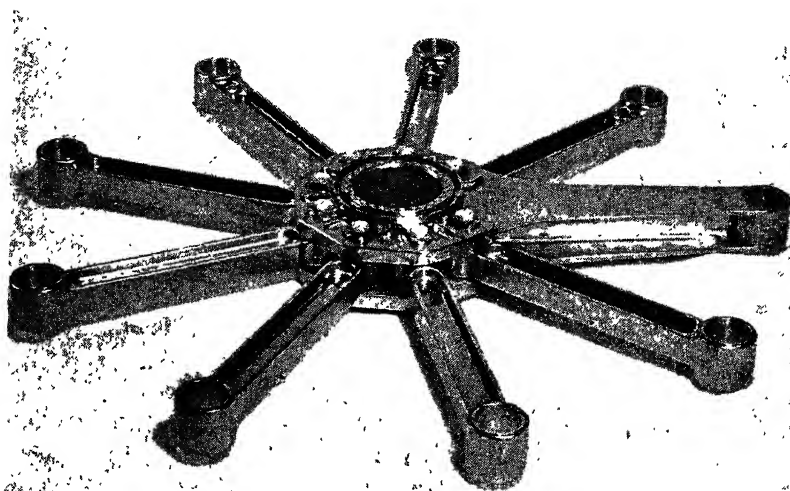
Articulated-rod system for a radial engine. (Wright Aeronautical Corp.)
